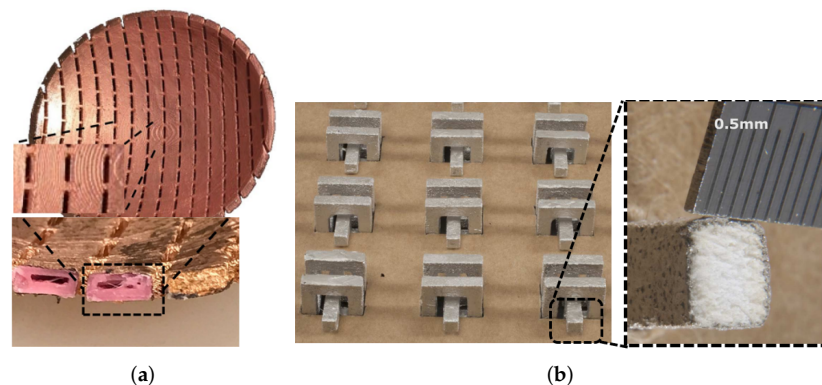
Examples of 3-D metamaterials manufactured by 3-D printing with subsequent metallization. (a) Design from [178] fabricated using FDM and electroplating. (b) Design from [135] fabricated using MJ and silver coating.
